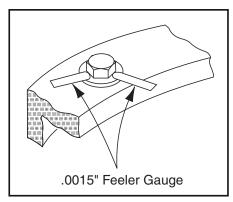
Swing Bearing Bolt Feeler Gauge Check
